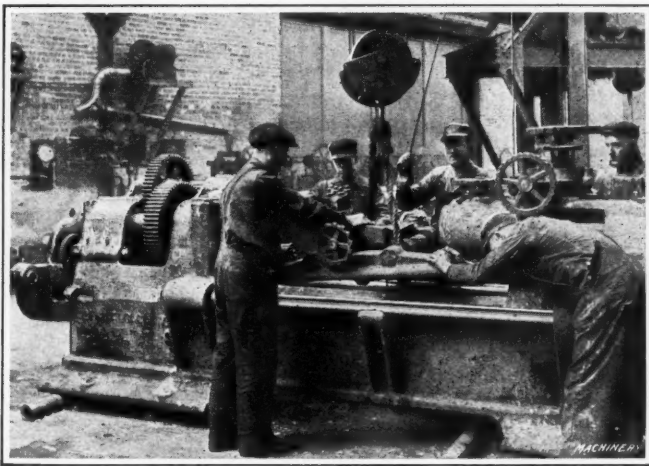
Assembling Carriage onto Lathe Bed. Attention is called to Design of Carriage
